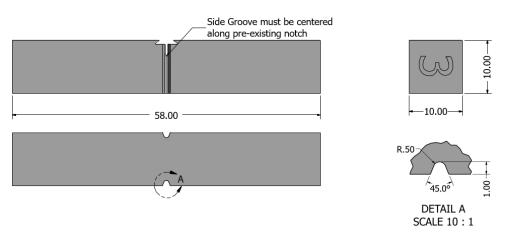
Drawing of the Charpy-type specimen after side-grooving.
